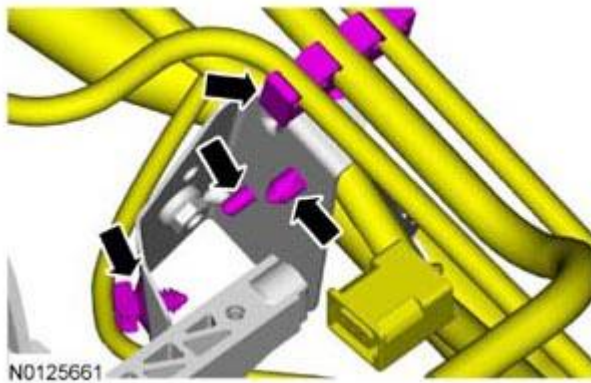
Locating Wiring Harness Retainers And Coolant Hose Retainer From Coolant Outlet Bracket
